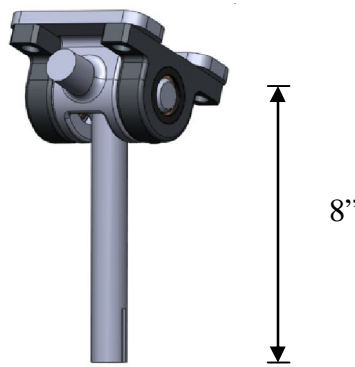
Joint, Pillow Block Bearings, and Output Shaft Assembly
